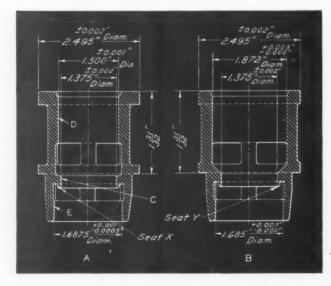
Velve bushings of similar design requiring boring operations performed by use of the face-plate chuck shown in Fig. 2
